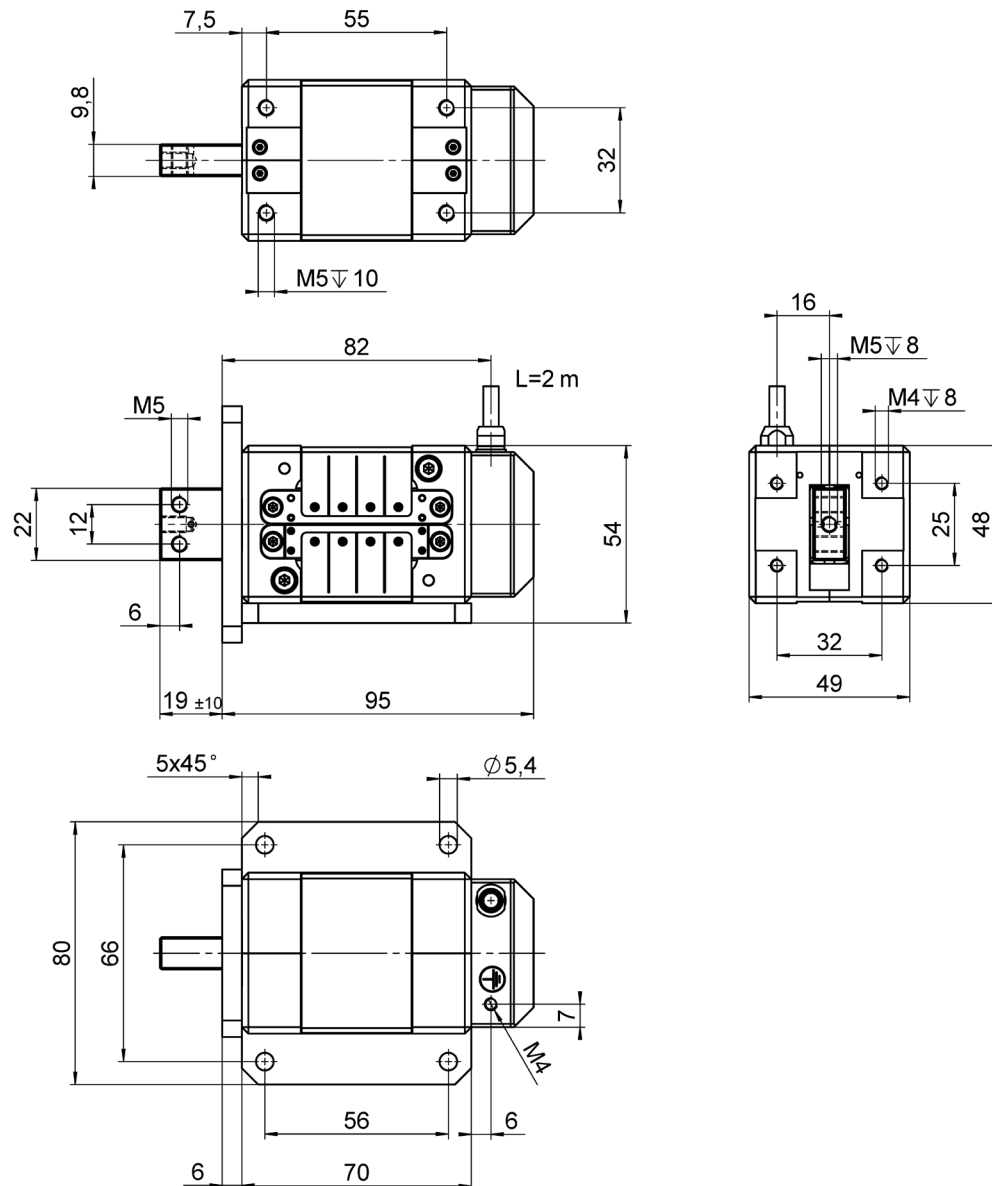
N-216 dimensions (all models), runner at center position. View sometimes with mounting flange.
